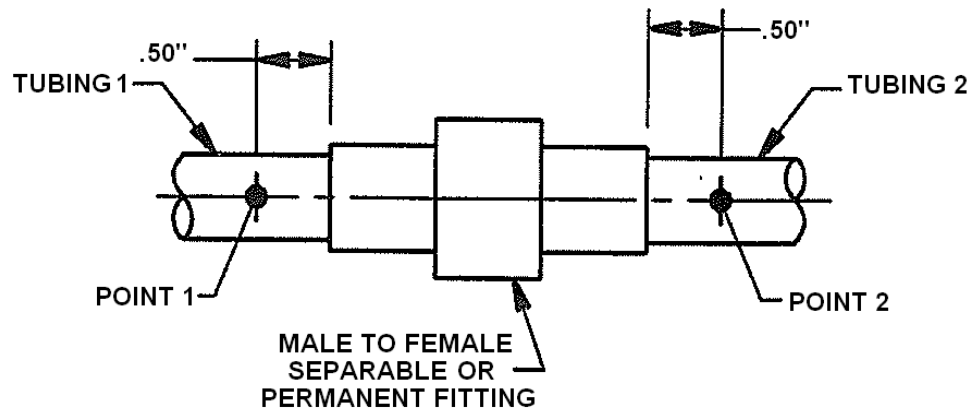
ELECTRICAL BONDING TEST SETUP
